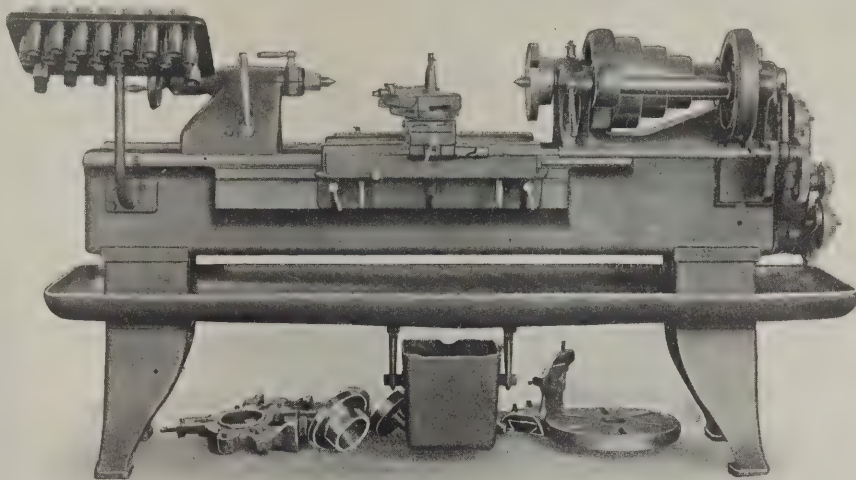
Rear View of Pratt & Whitney Cone-driven Style Lathe, showing Relieving Attachment.
